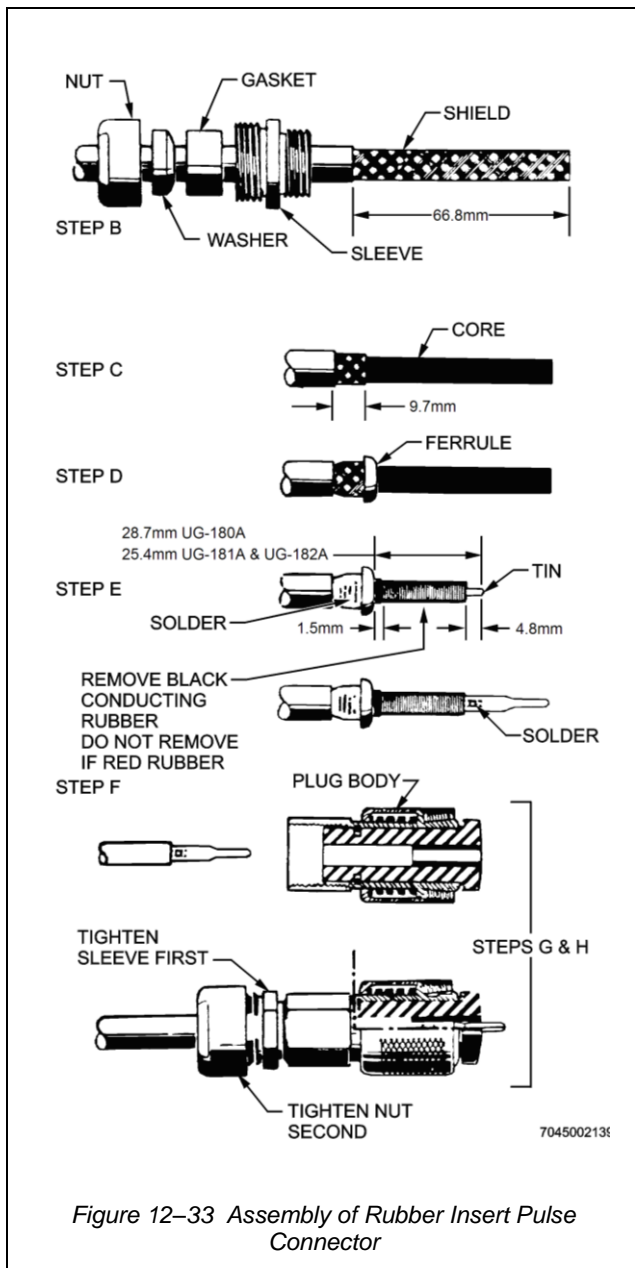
Assembly of Rubber Insert Pulse Connector
